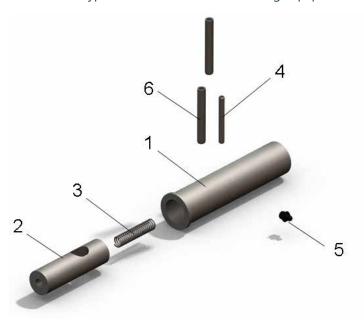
Locking equipment for SDS 65 up to SDS 350
